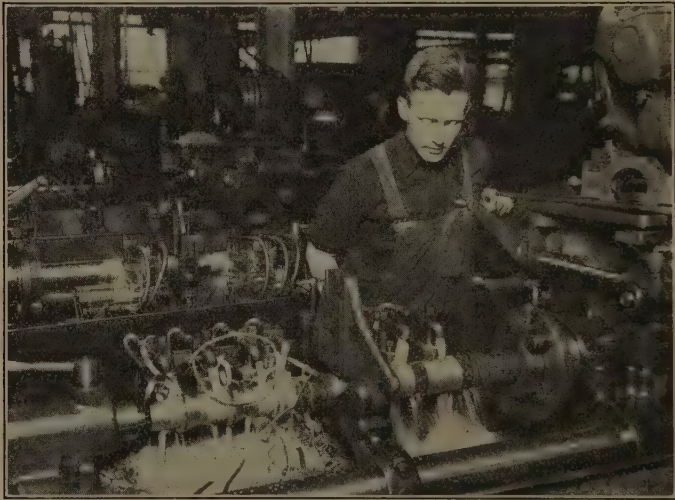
AUTOMATIC LATHES WITH ADJUSTABLE EQUIPMENT FOR MACHINING SHAFTS
